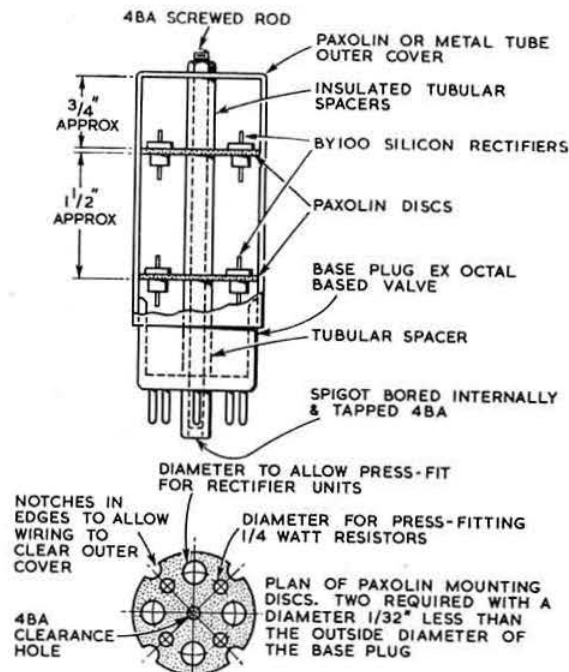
The method of encapsulating the rectifier unit devised by the writer.
